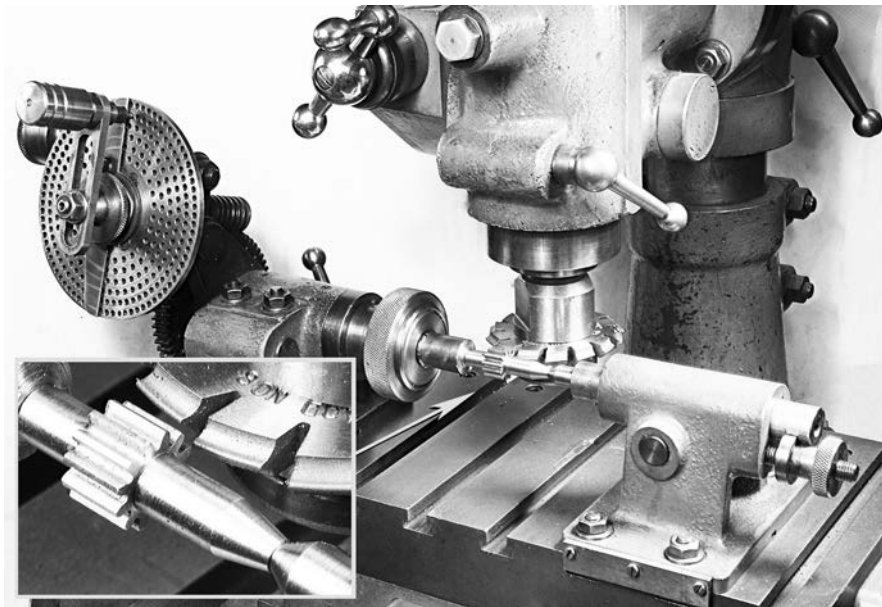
Cutting the 12 tooth 1.0 mod pinion on the feed spindle
